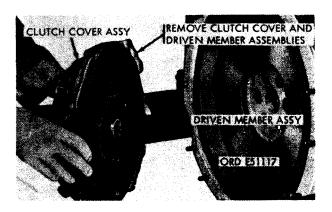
REMOVING CLUTCH COVER AND DRIVEN MEMBER ASSEMBLY. (3) Figure 276. (A) Remove top 1/2 x 1-1/8 place bolt and install pilot bolt to guide flywheel during removal. (B) Remove the remaining five 1/2 x 1-1/8 place bolts securing flywheel to crankshaft. (C) Remove flywheel.
